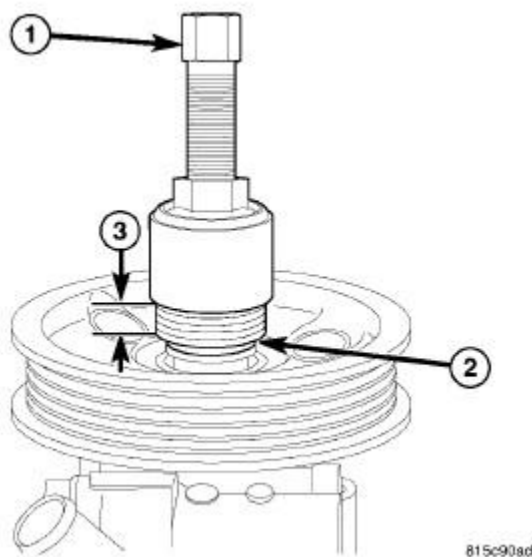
Install Pulley Using C-4063C, 6936 & Washers
